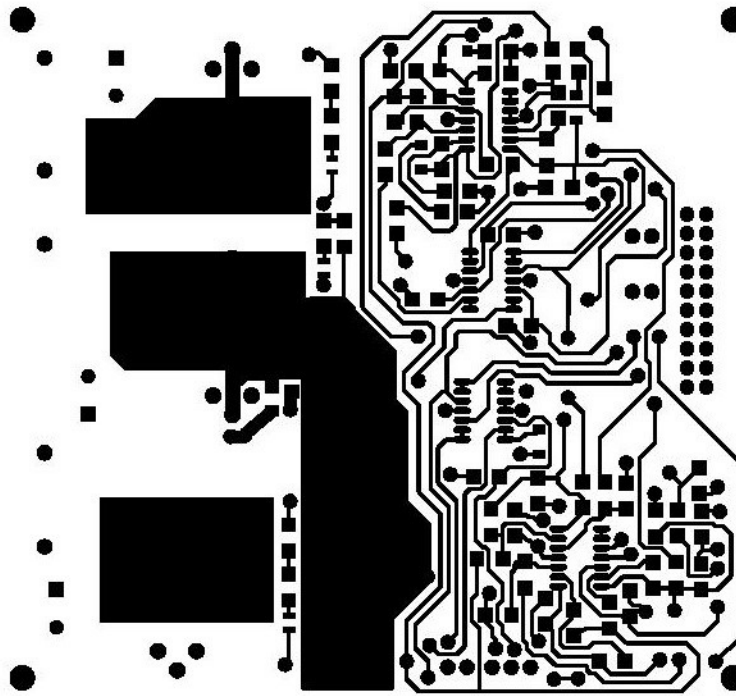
Miniature MOSFET Gate Control Board PCB Mask Top
